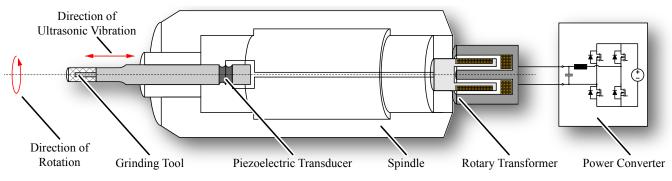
Schematic view of the inside of the grinding spindle used for ultrasonic assisted grinding.
